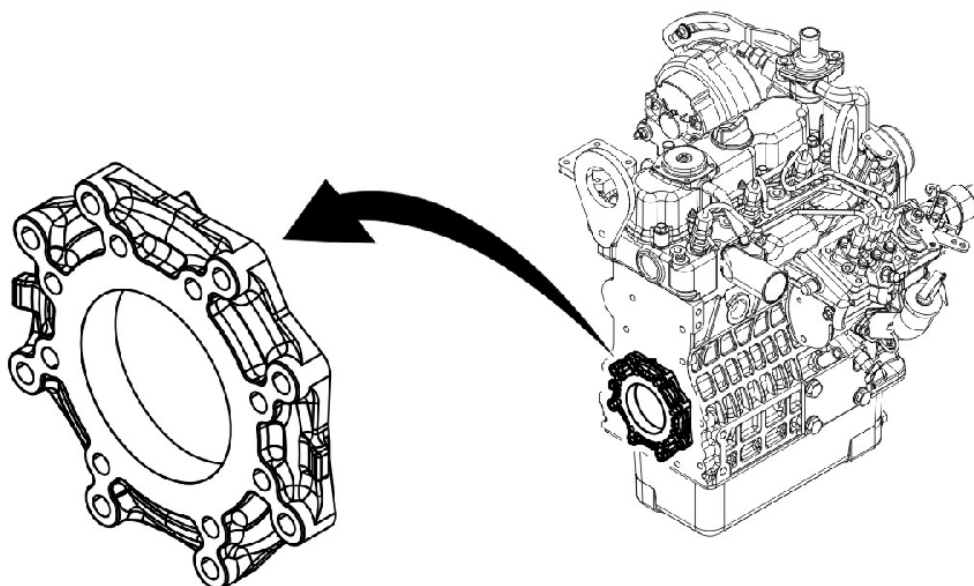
Crankcase Rear Bearing Case Cover - Location.
